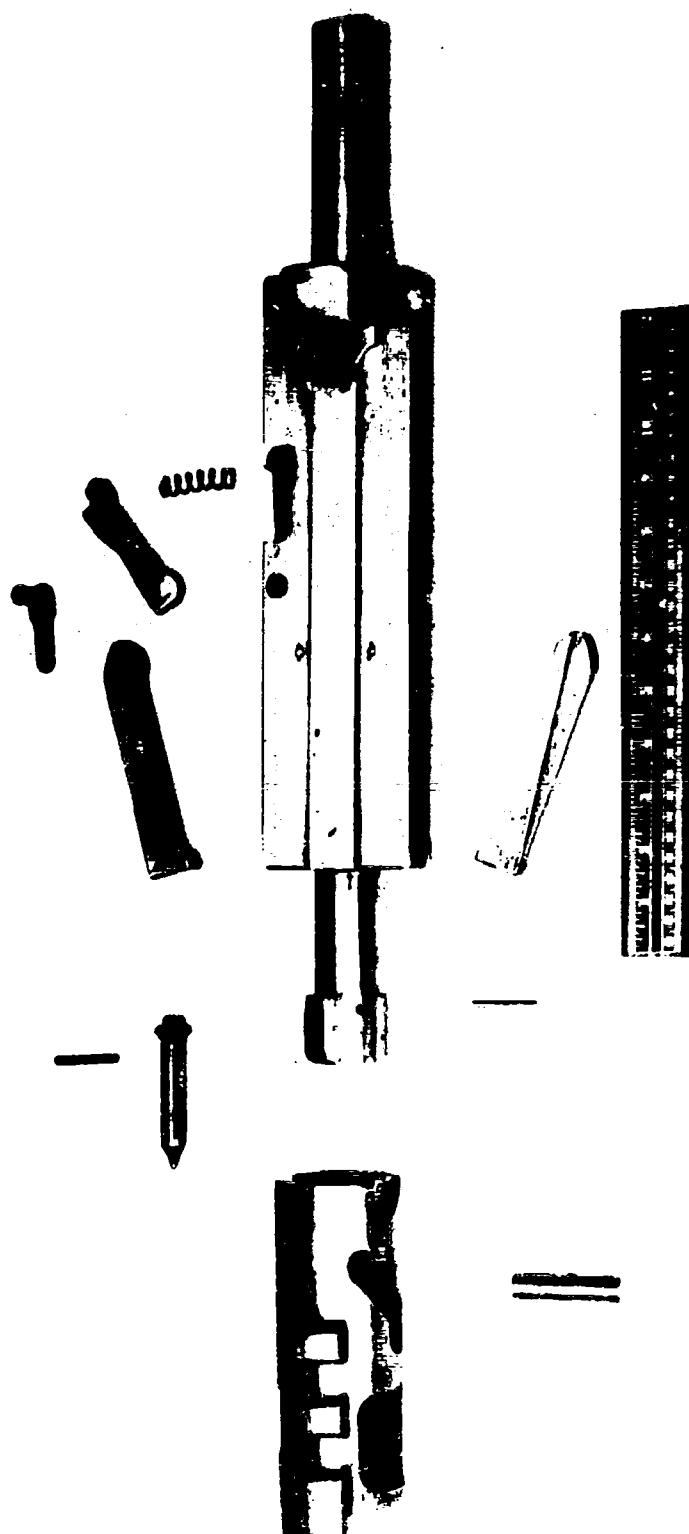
BOLT FOR 37MM NS GUN, DISASSEMBLED
